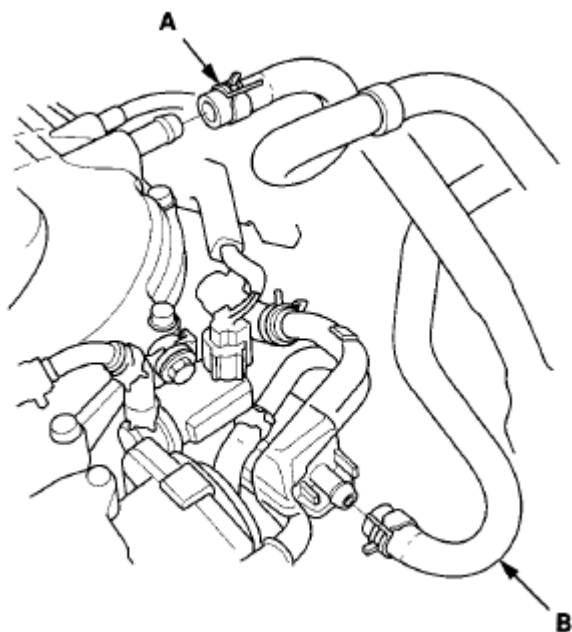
Installing Brake Booster Vacuum Hose And EVAP Canister Hose
